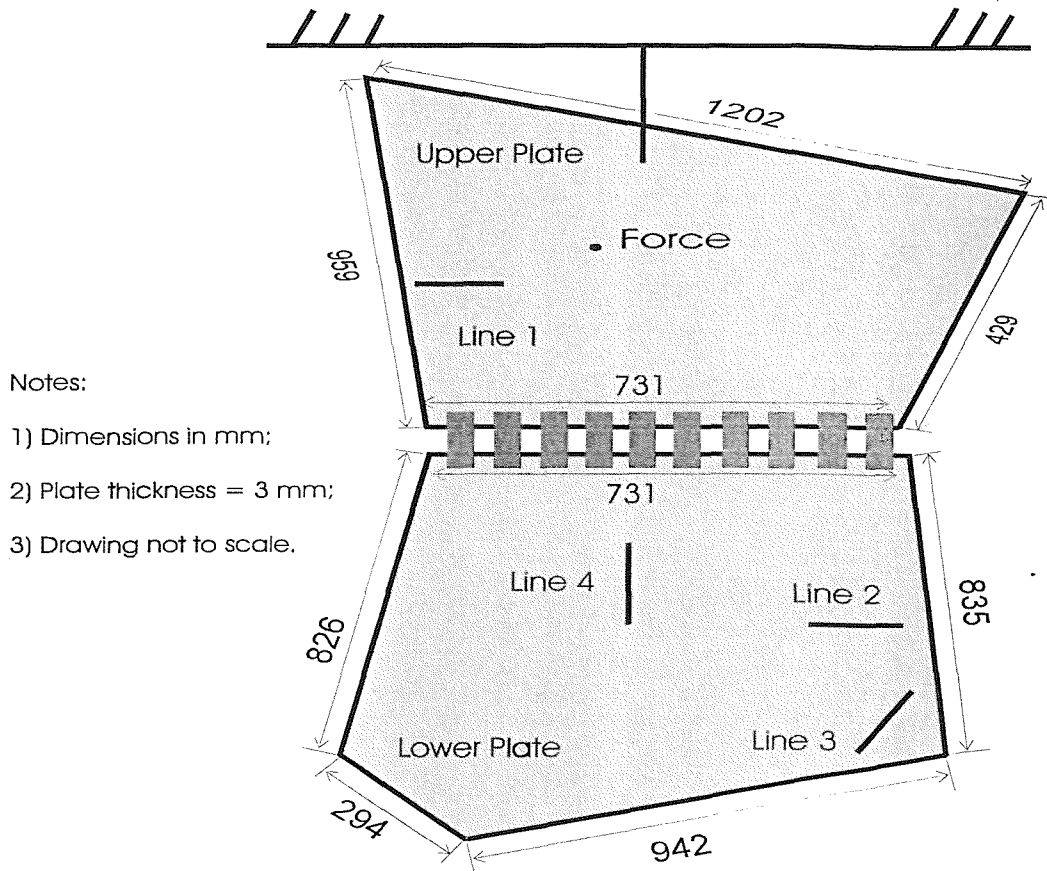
Sketch of measurement lines used and dimensions of coupled plates.
